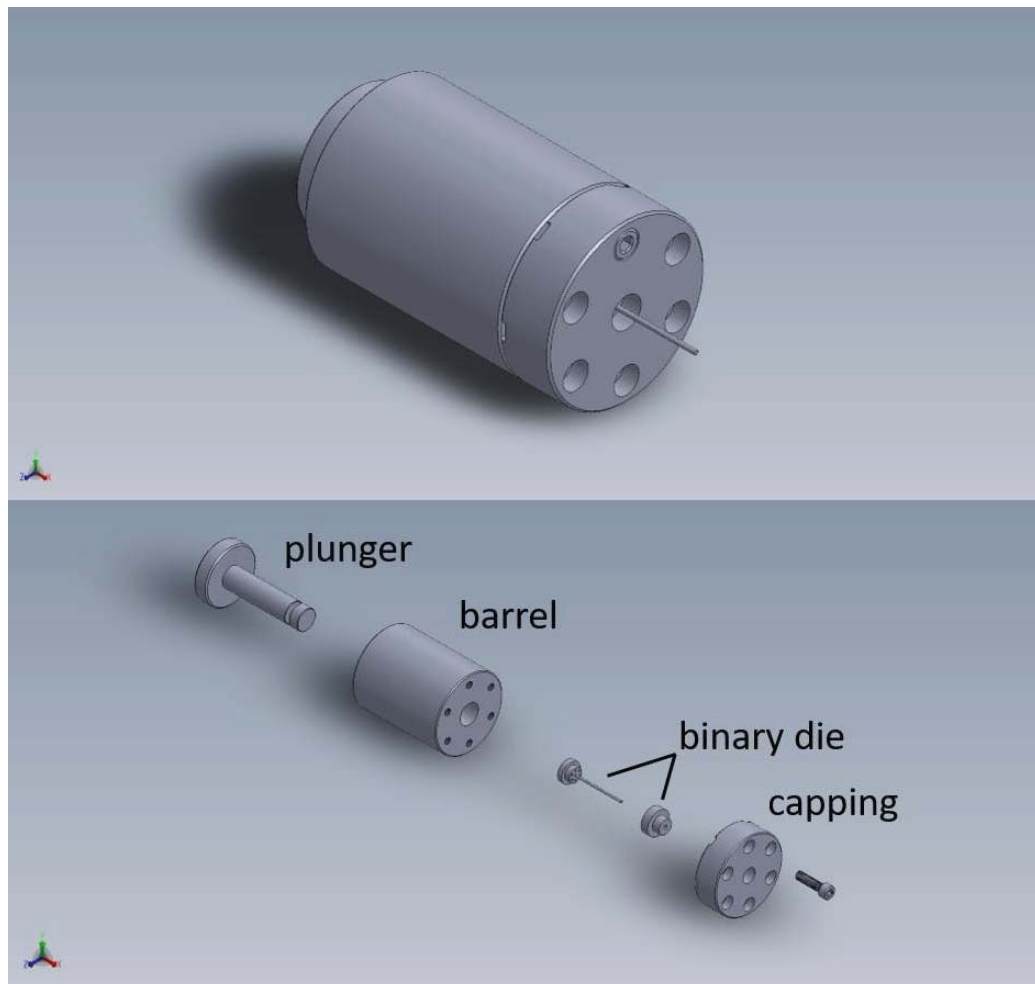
3-D schematic of assembling and disassembling views of the tailor made extrusion die set for this project
